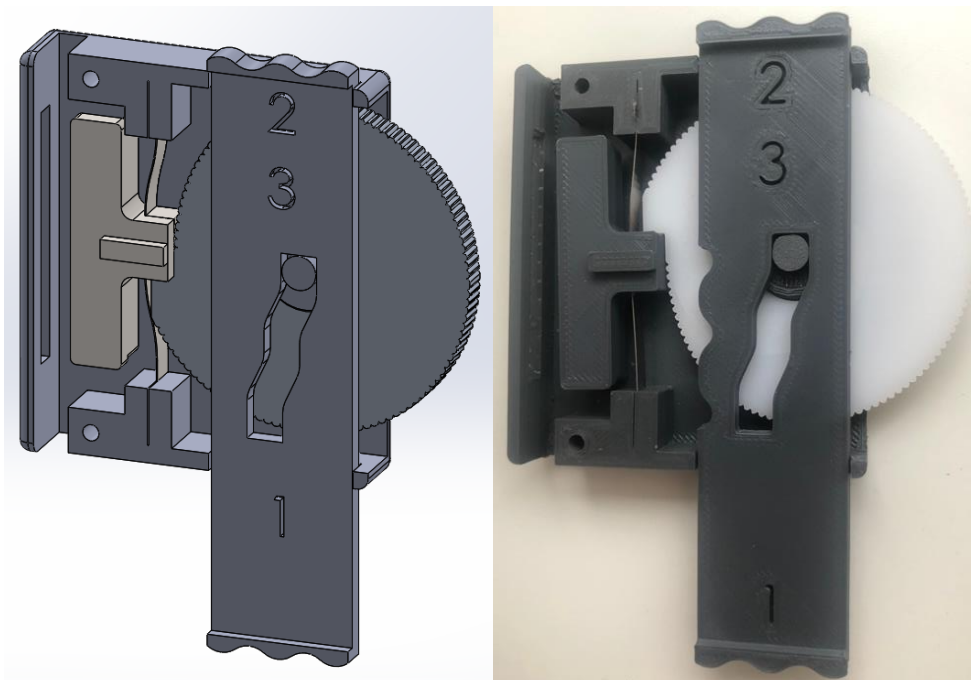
Frontal view of the DropAdjust v3 CAD model (left) and prototype (right). Shown without housing cap.
